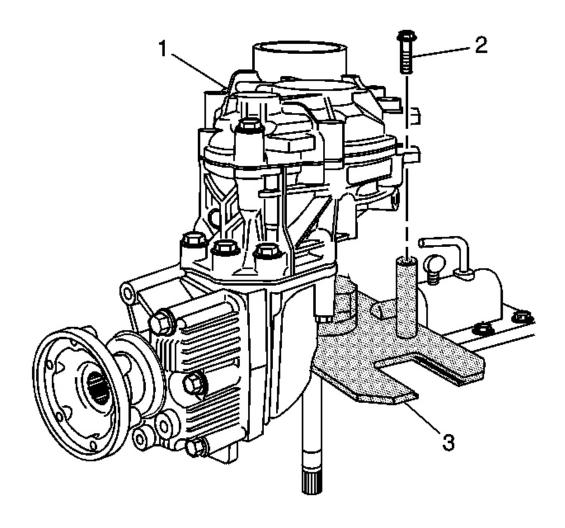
Identifying J 44755 Courtesy of GENERAL MOTORS CORP.
